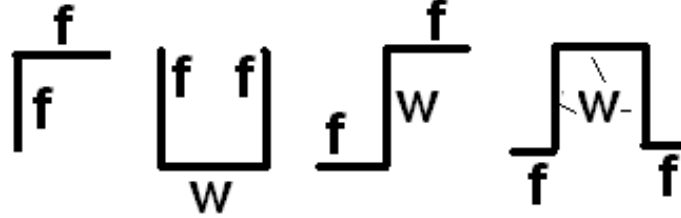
(a) Extruded angle; (b) Formed channel; (c) Extruded Z; (d) Formed 'top hat'
